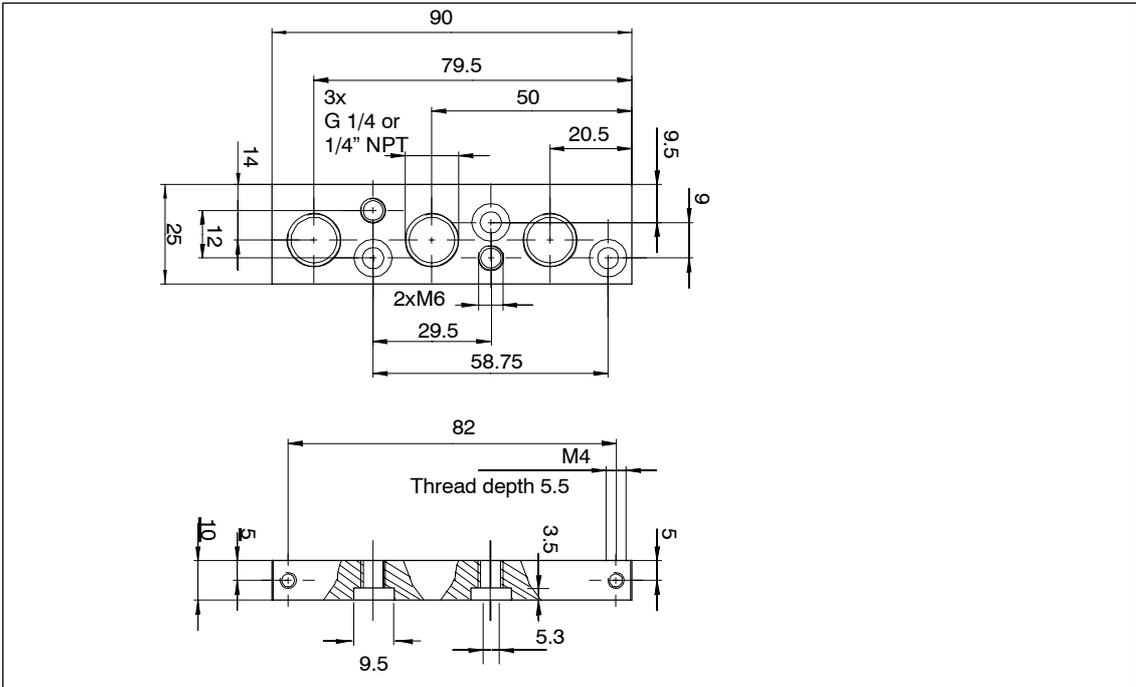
Dimensional drawing terminal strip for plastic housing
